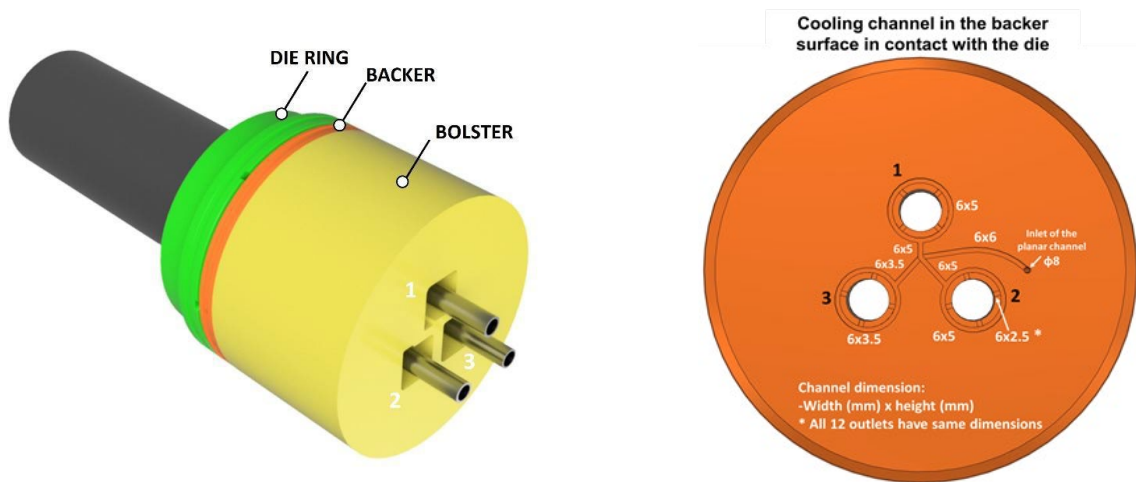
Rendering of the billet and tools set-up (left) and Cooling Channel Design (right).
